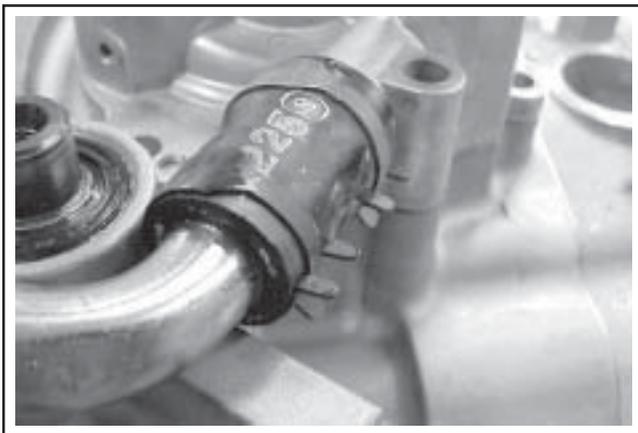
Transfer Tube Hose Clamp(s) Detail.
